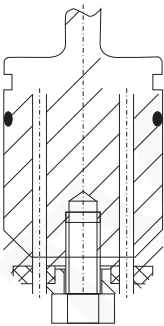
ZJHM-Q Regulating cut-off type valve core (Single seat seal)
